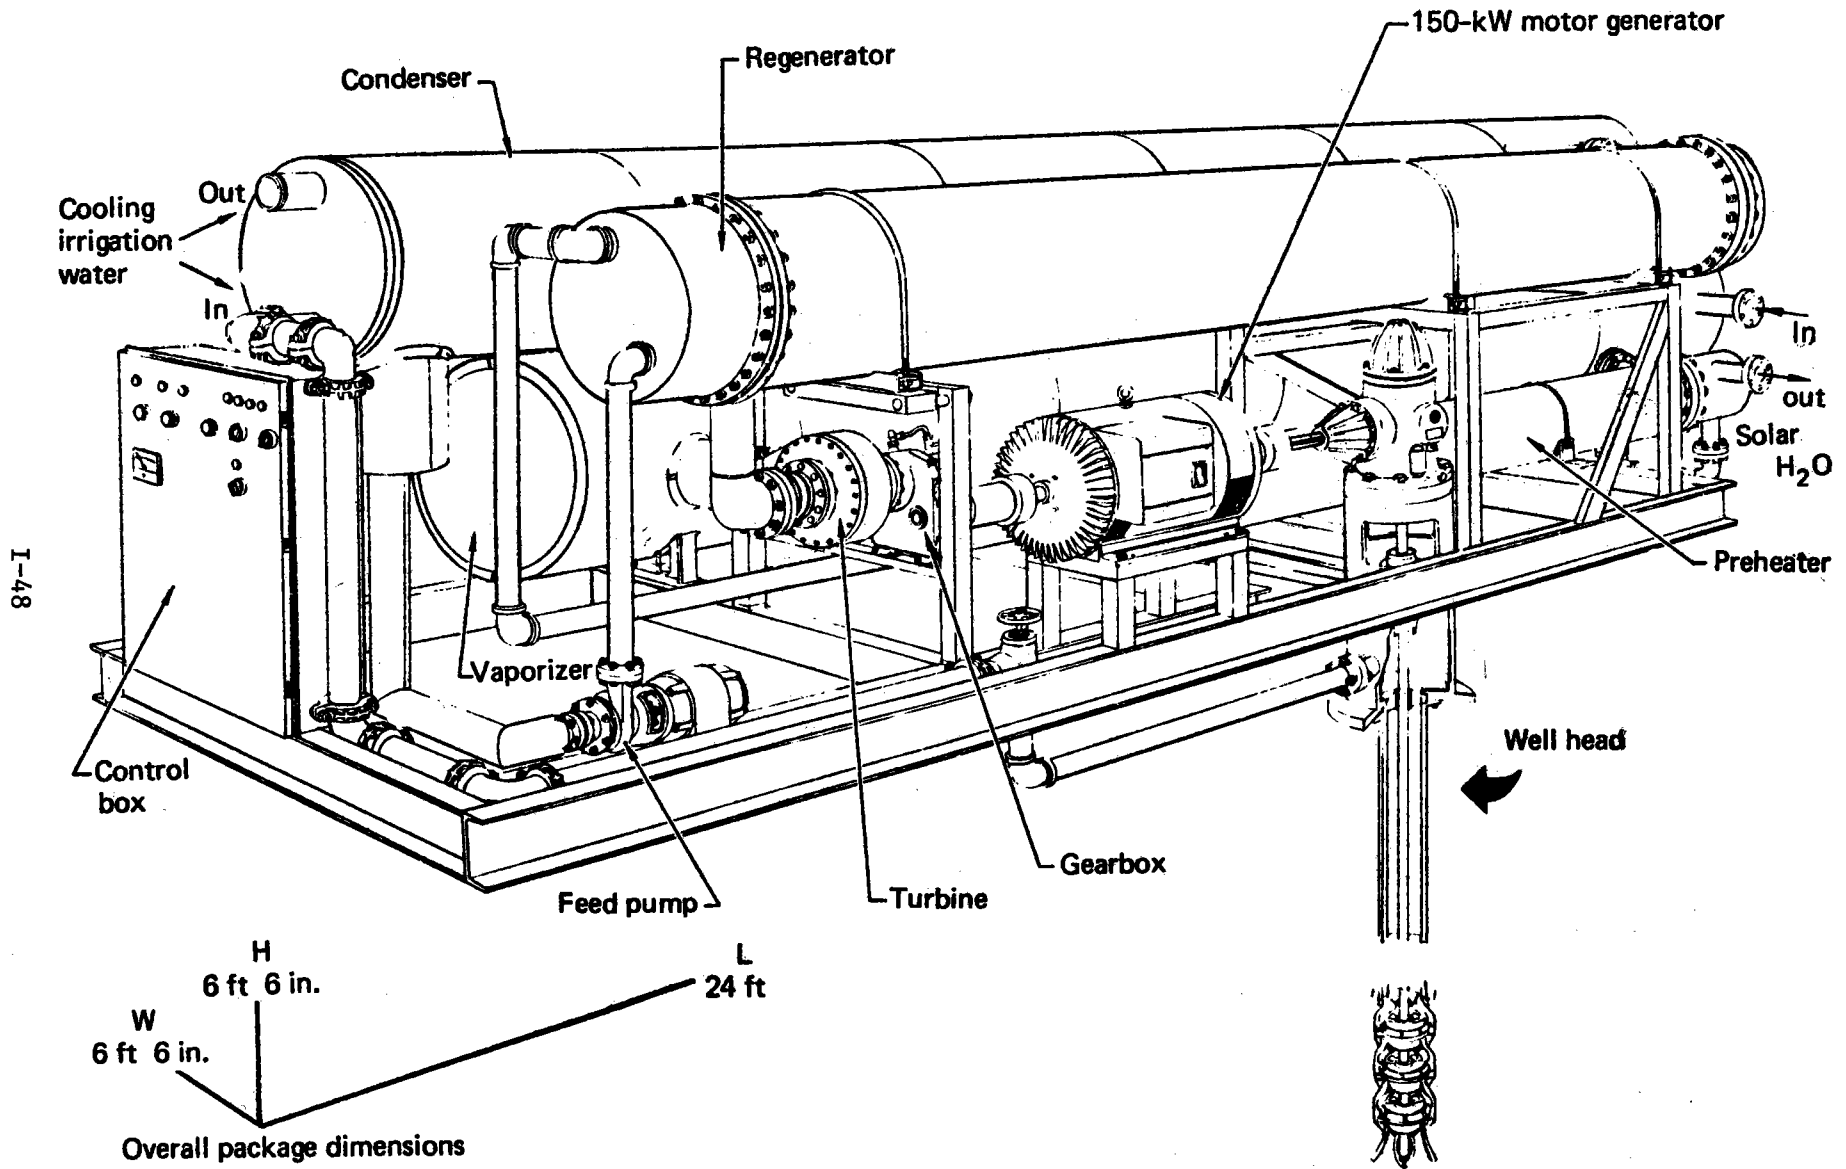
ORC ENGINE CONVERSION MACHINERY [15]
